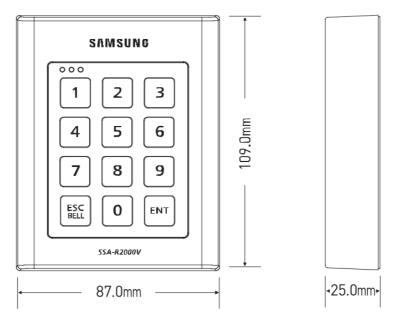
The dimensions of the SSA-R2000V sensor
